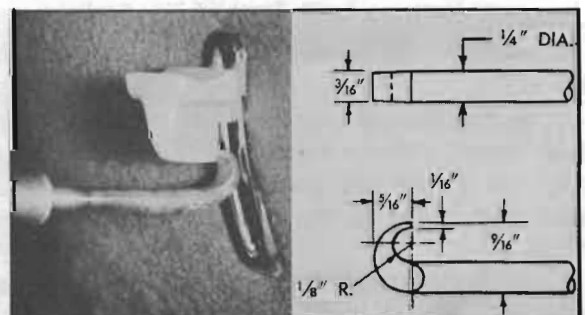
Tool for Removing Spring Type Seat Adjuster Knob
